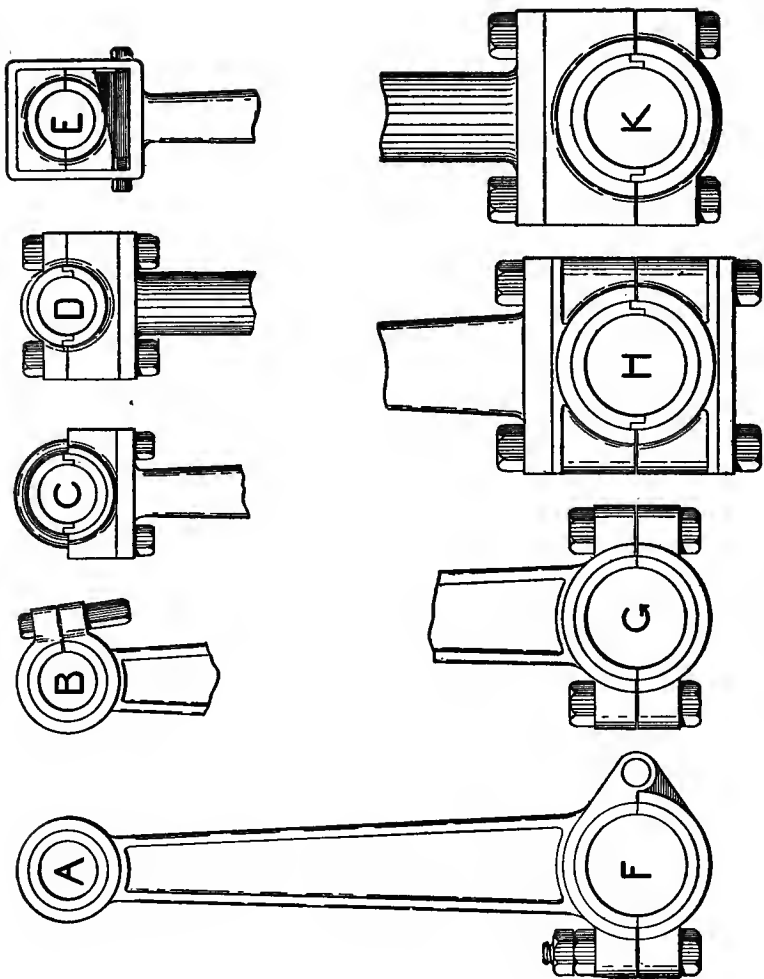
ADJUSTMENTS OF CONNECTING ROD BEARINGS.
